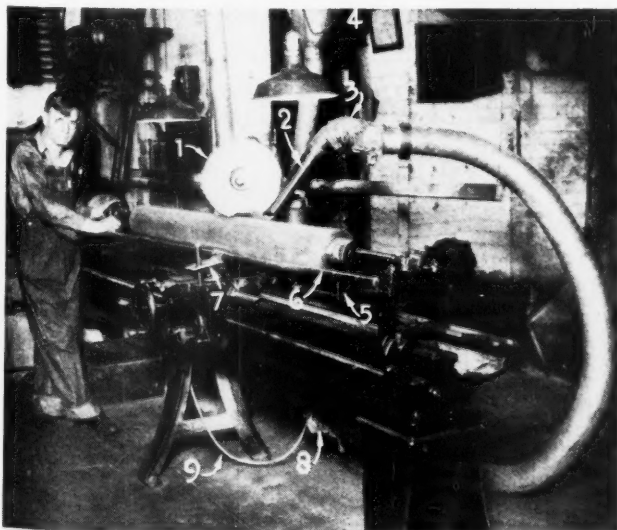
Rubber roller grinding equipment devised by Tom Pentland for use in the plant of the "Cleveland Plain Dealer." The conventional type lathe is equipped with a grinding unit 1, a suction unit 2-3-4 to collect the rubber particles removed in the process of grinding, and a "sling" mechanism 5-6-7-8 with which to automatically polish the roller after grinding.
